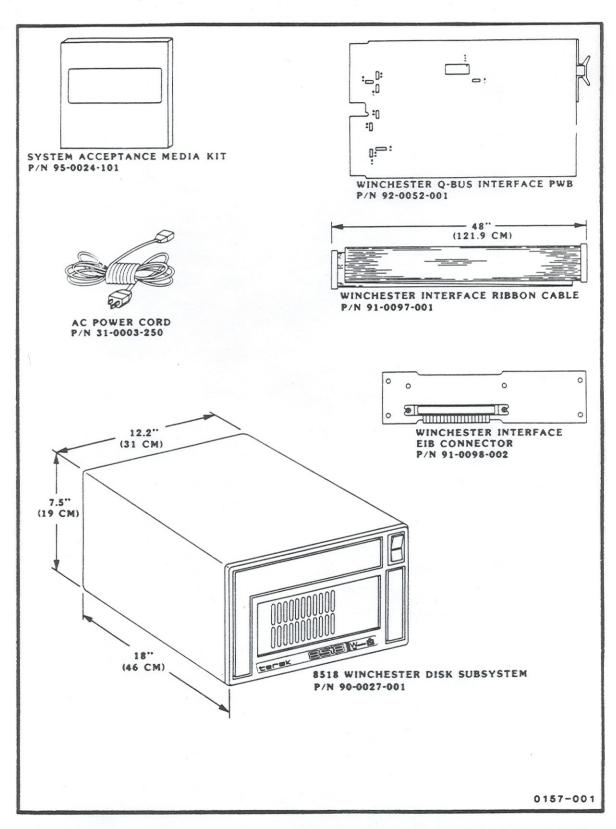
COMPONENTS - 851B WINCHESTER DISK DRIVE ASSEMBLY
